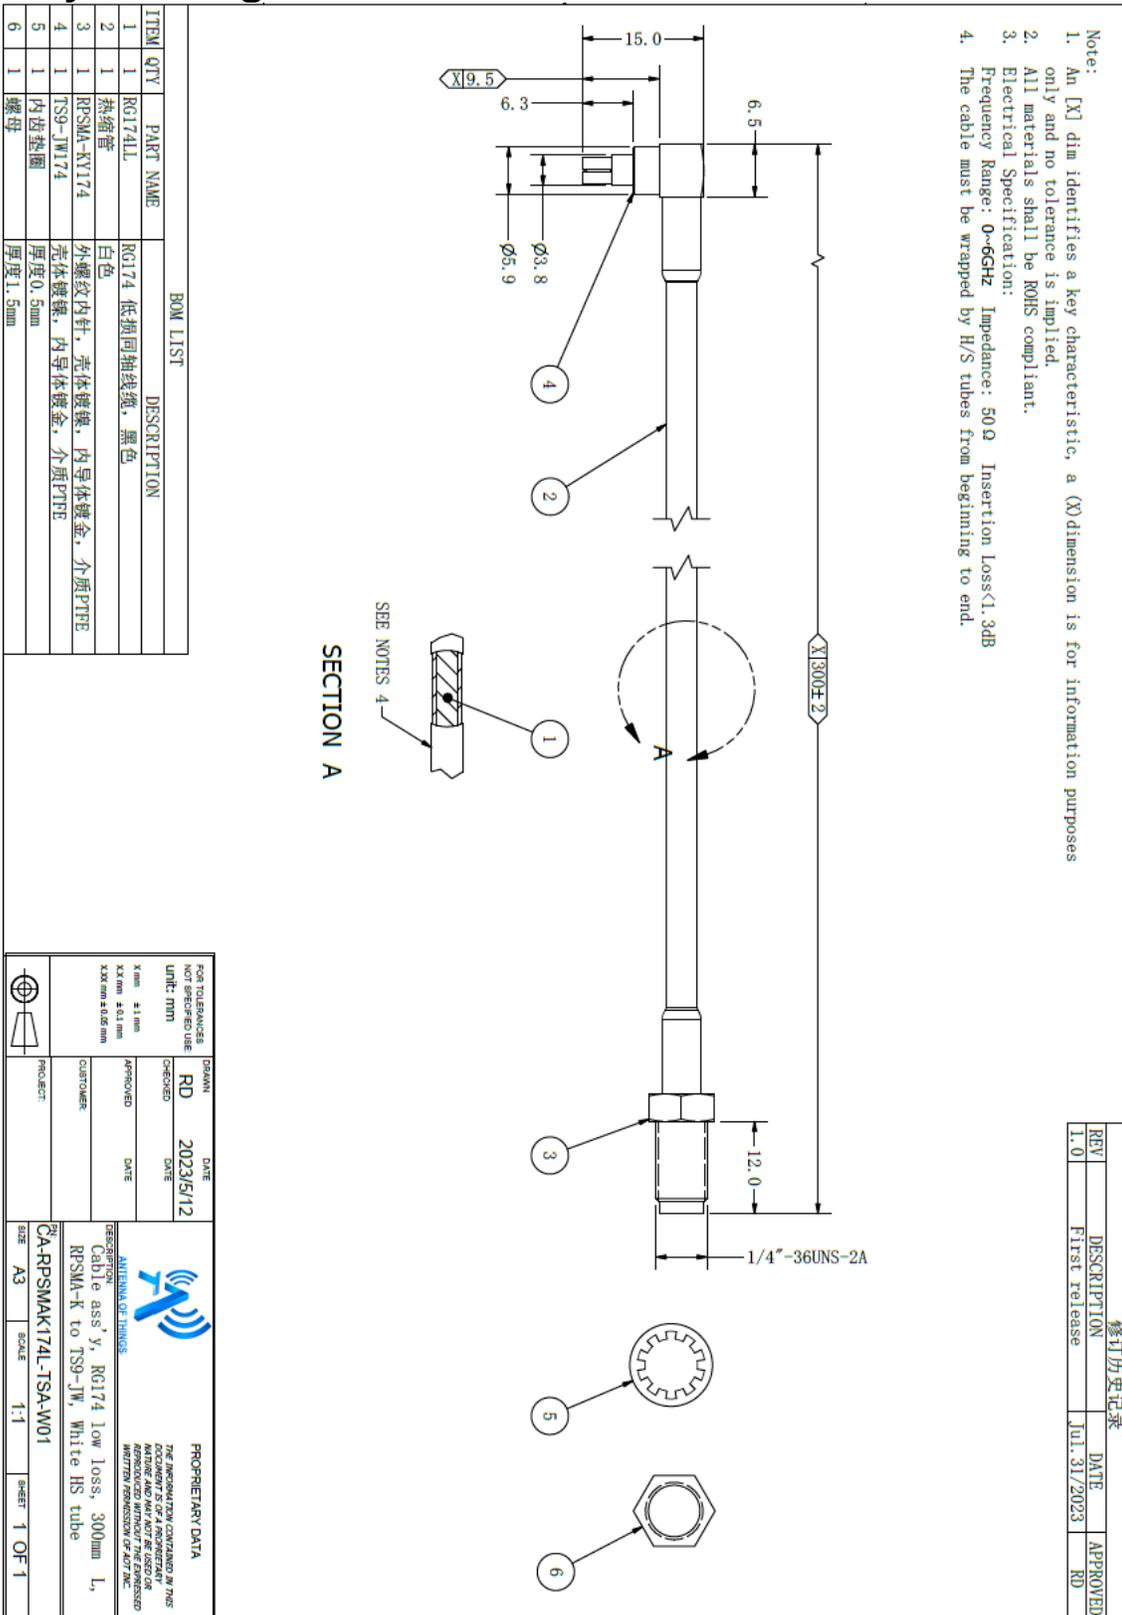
Model CA-RPSMAK174L-TSA-W01 Assembly Drawing
